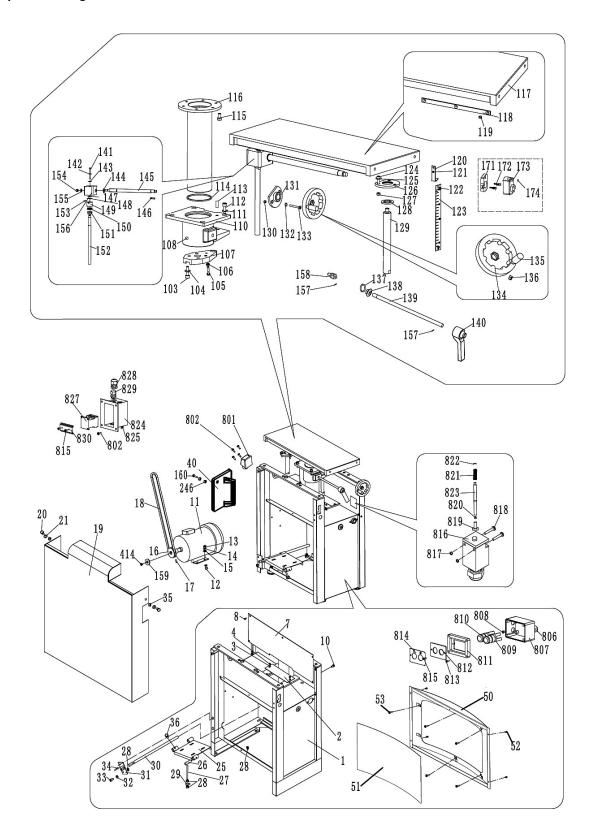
Spare parts drawing 1 ADH 31-4 C and 41-4 C
